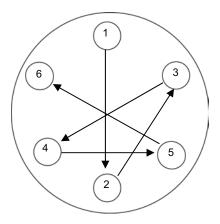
Third Stage Valve Head Cap Screw Torque Sequence.
